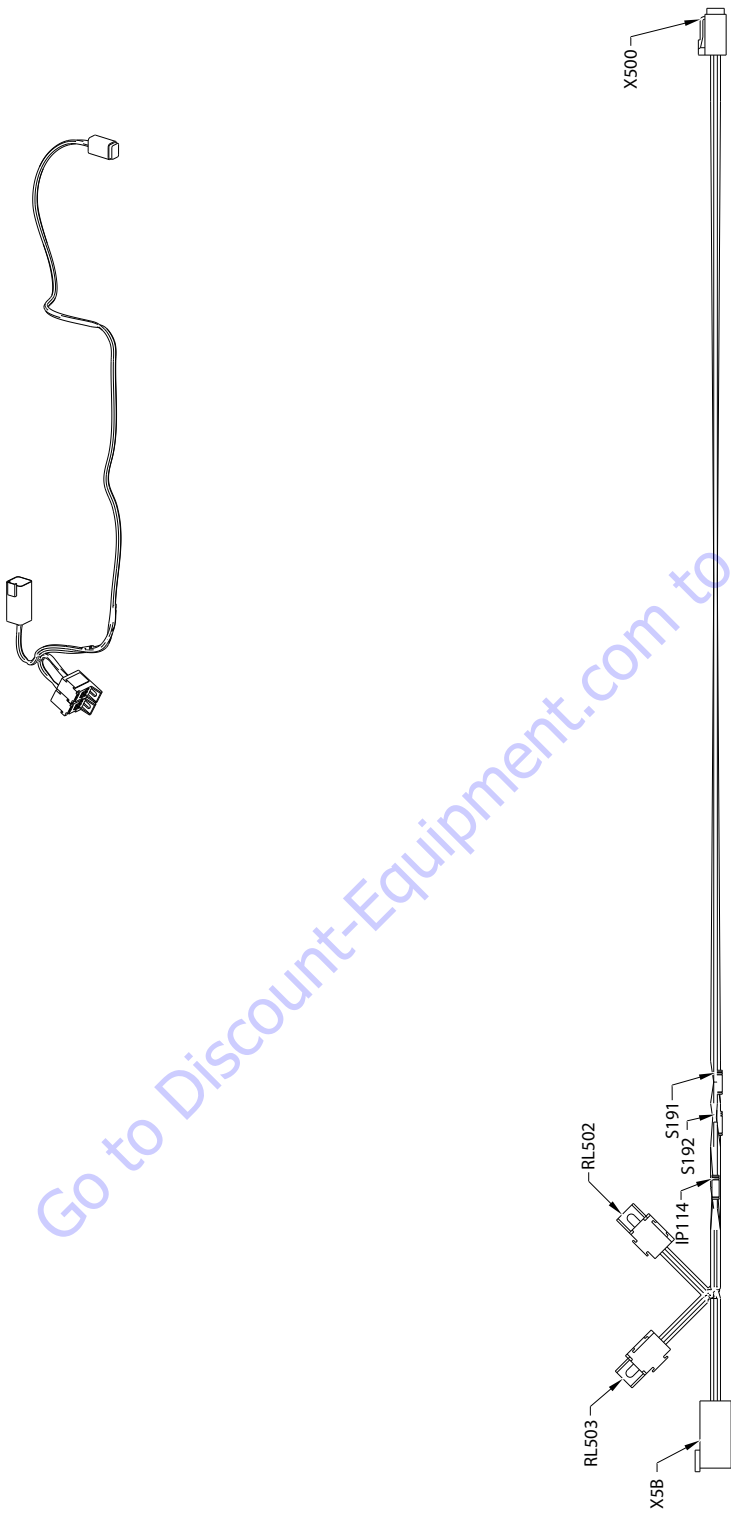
Platform Valve w/Jib Harness - Sheet 3 of 3
